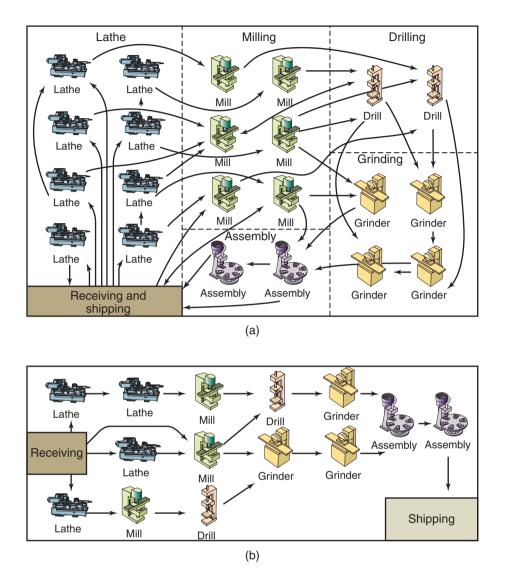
(a) Functional layout of machine tools in a traditional plant; arrows indicate the flow of materials and parts in various stages of completion. (b) Group-technology (cellular) layout. Legend: L = lathe, M = milling machine, D = drilling machine, G = grinding machine, A = assembly. *Source:* After M.P. Groover.
